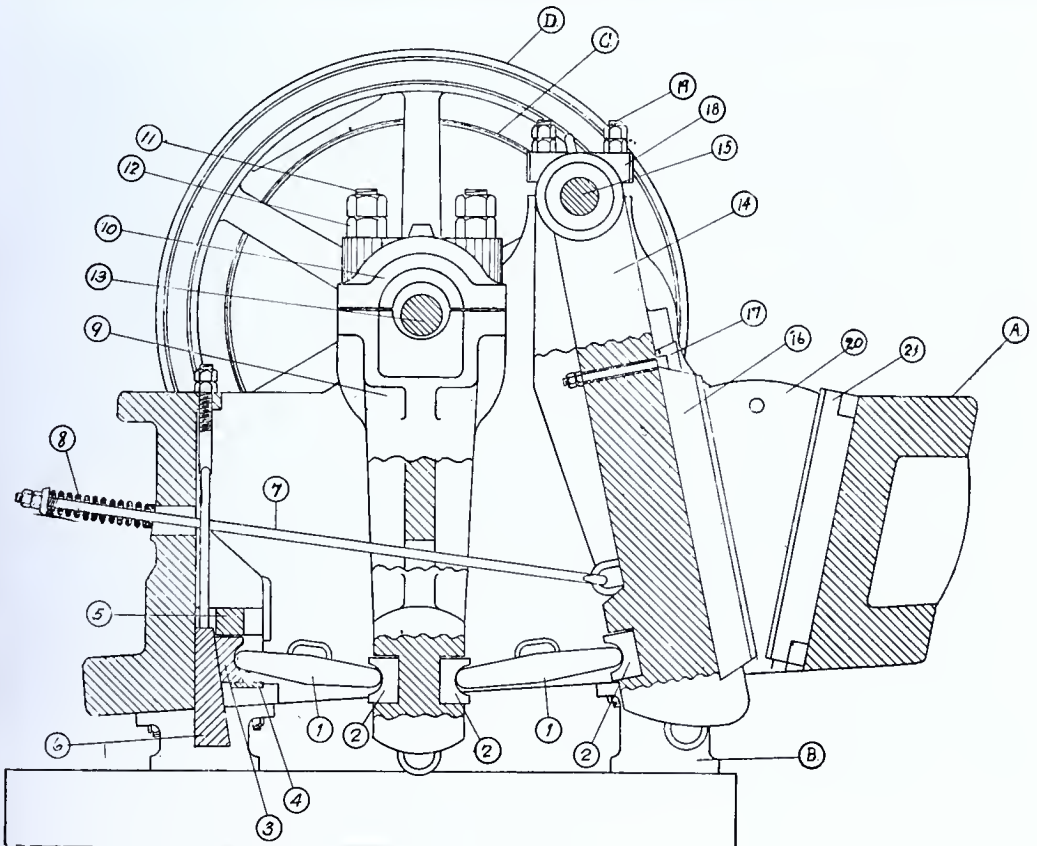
Standard Blake Type Crusher. Built by Lewistown Foundry and Machine Co.
